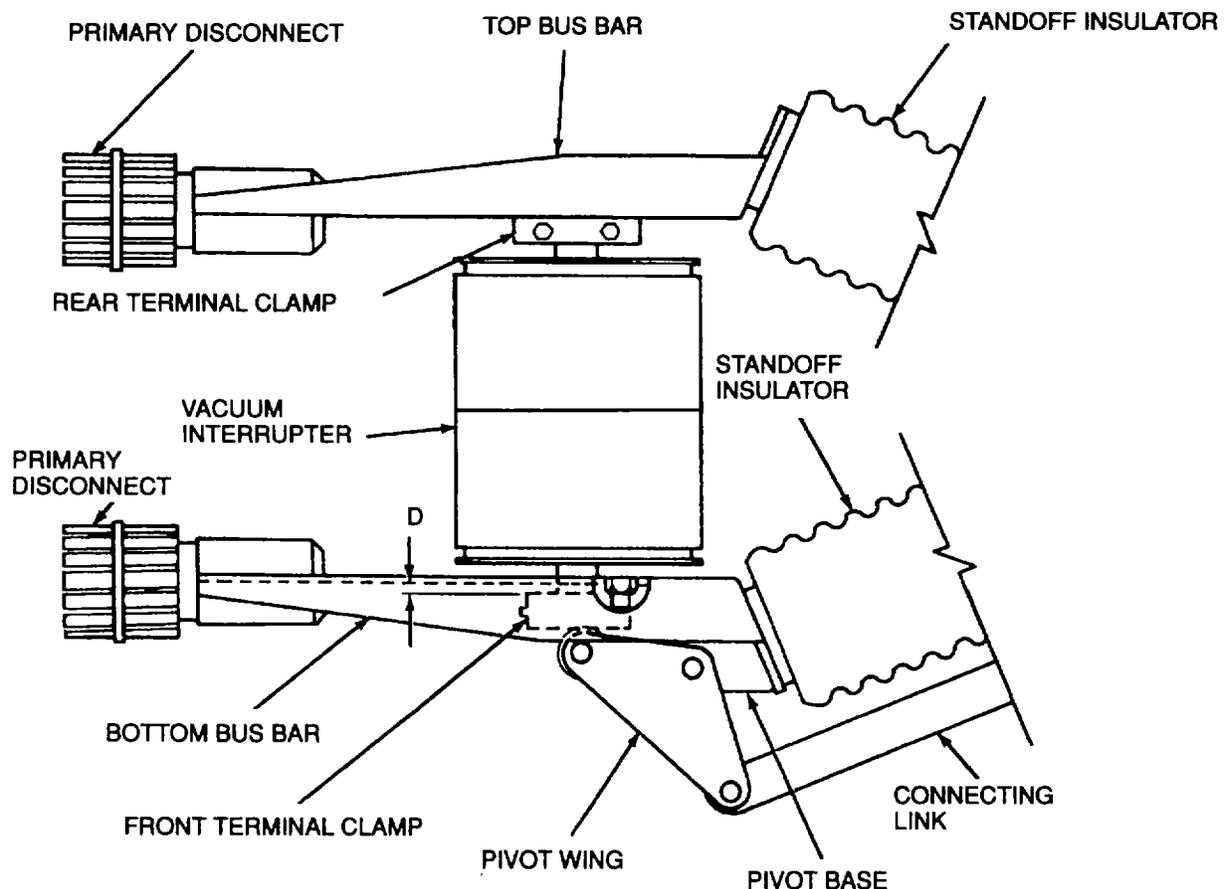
Load Circuit Breaker CB101, Detail of Vacuum Interrupter Assembly
